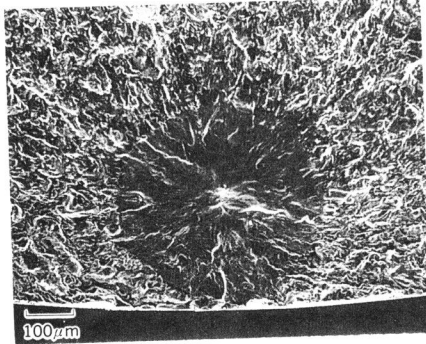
Example of fish-eye pattern on fracture surface fatigued at 400°C
